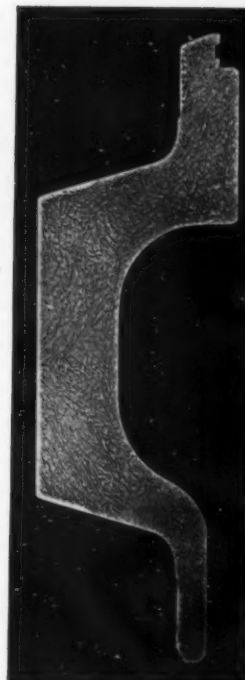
Macrostructure of Mercedes-Benz D.B. 601A reduction gear pinion on forward end of crankshaft.
